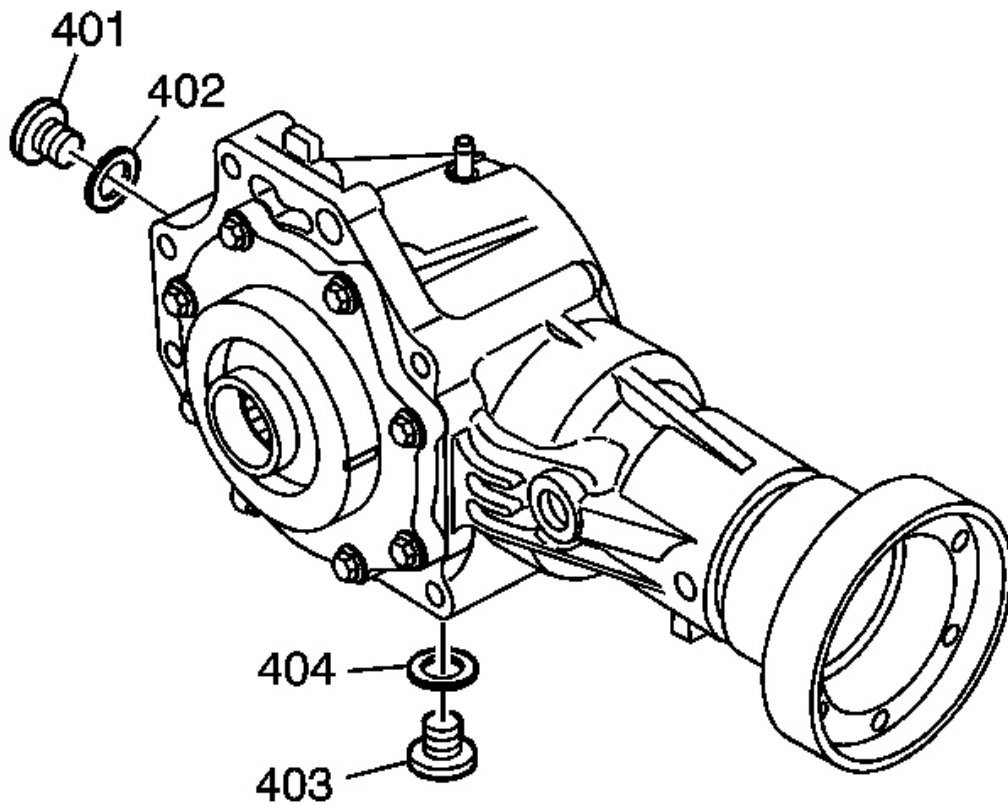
Removing/Installing Fill Plug, Washer, Drain Plug & Washer
